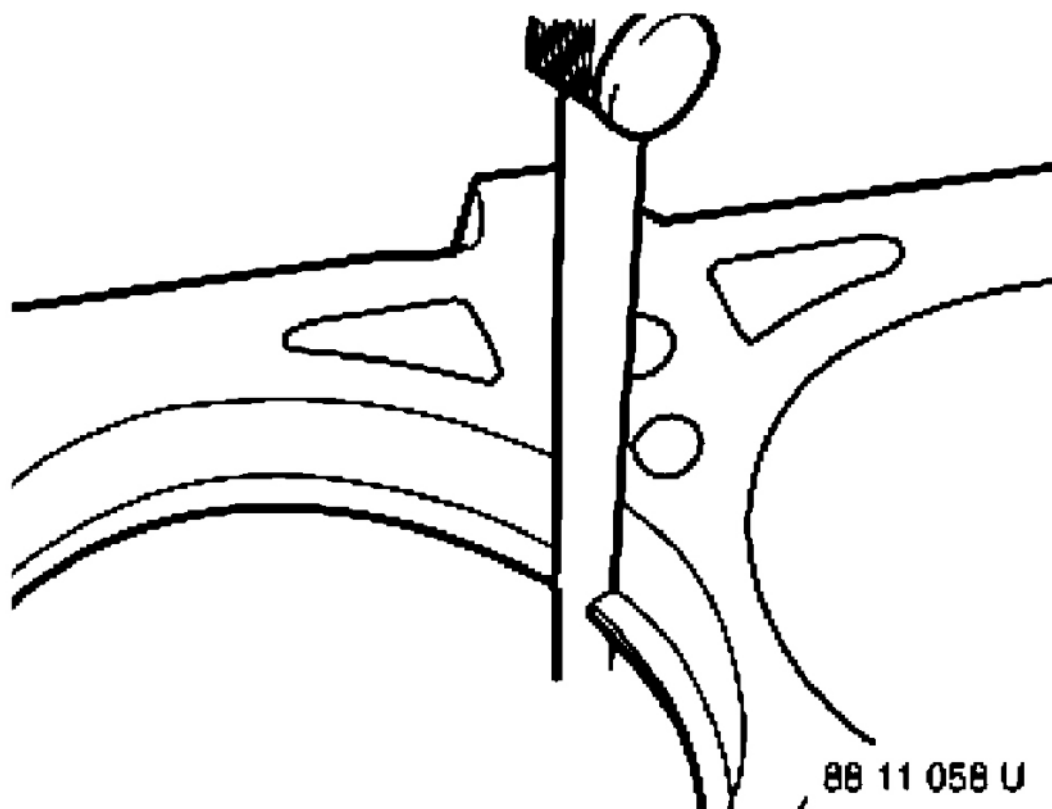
Checking Piston Ring Gap With Feeler Gauge
